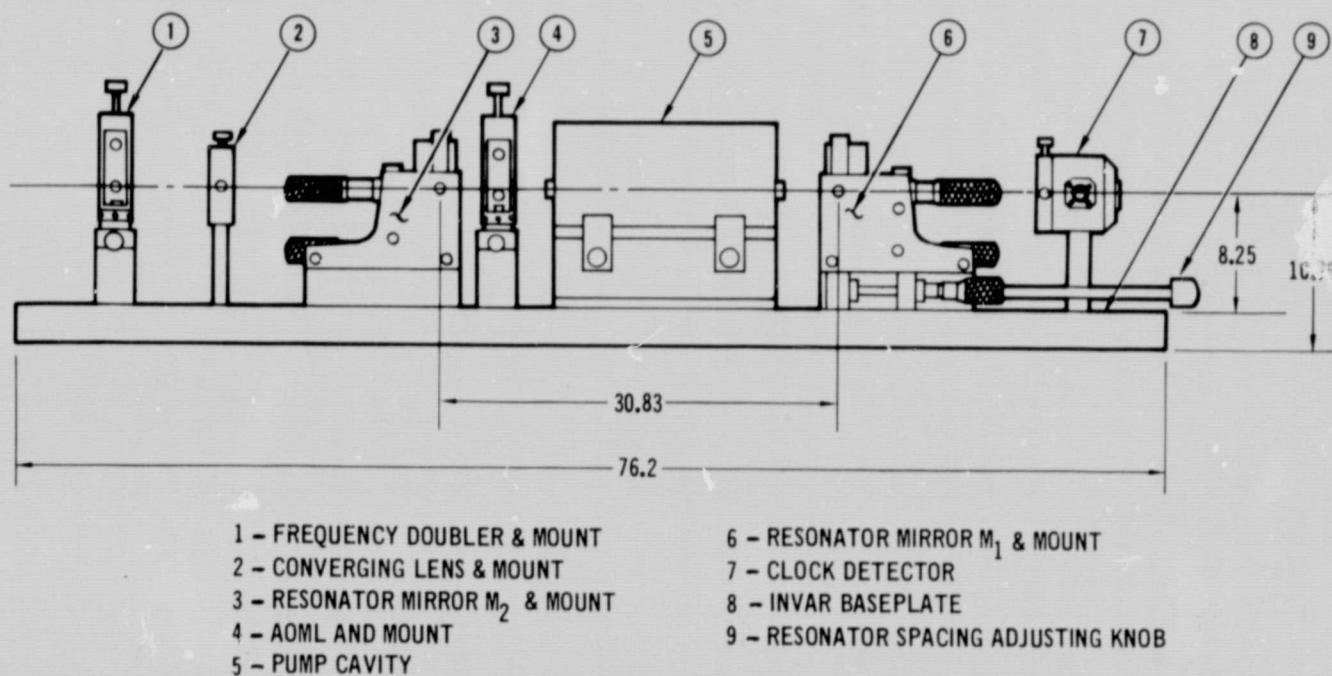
LASER ASSEMBLY OUTLINE DRAWING
